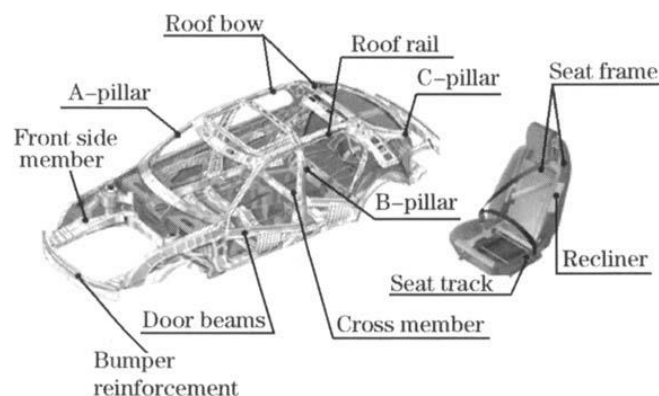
The automobile parts in which DP 600 steel is used[8]
